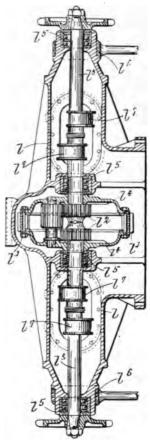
Clarkson steam omnibus. Horizontal longitudinal section showing differential gear and countershaft.
